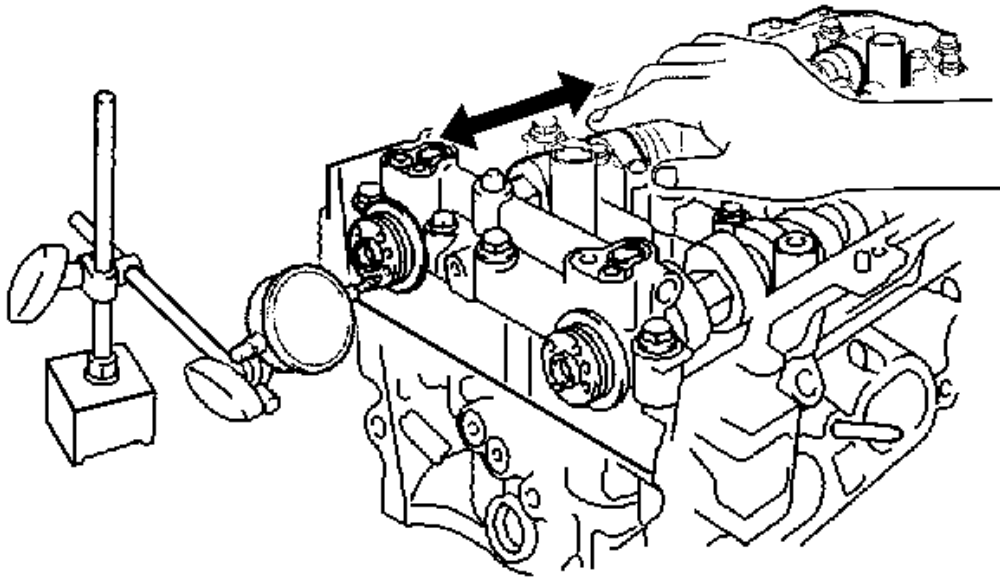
Measuring Thrust Clearance While Moving Camshaft Back & Forth
